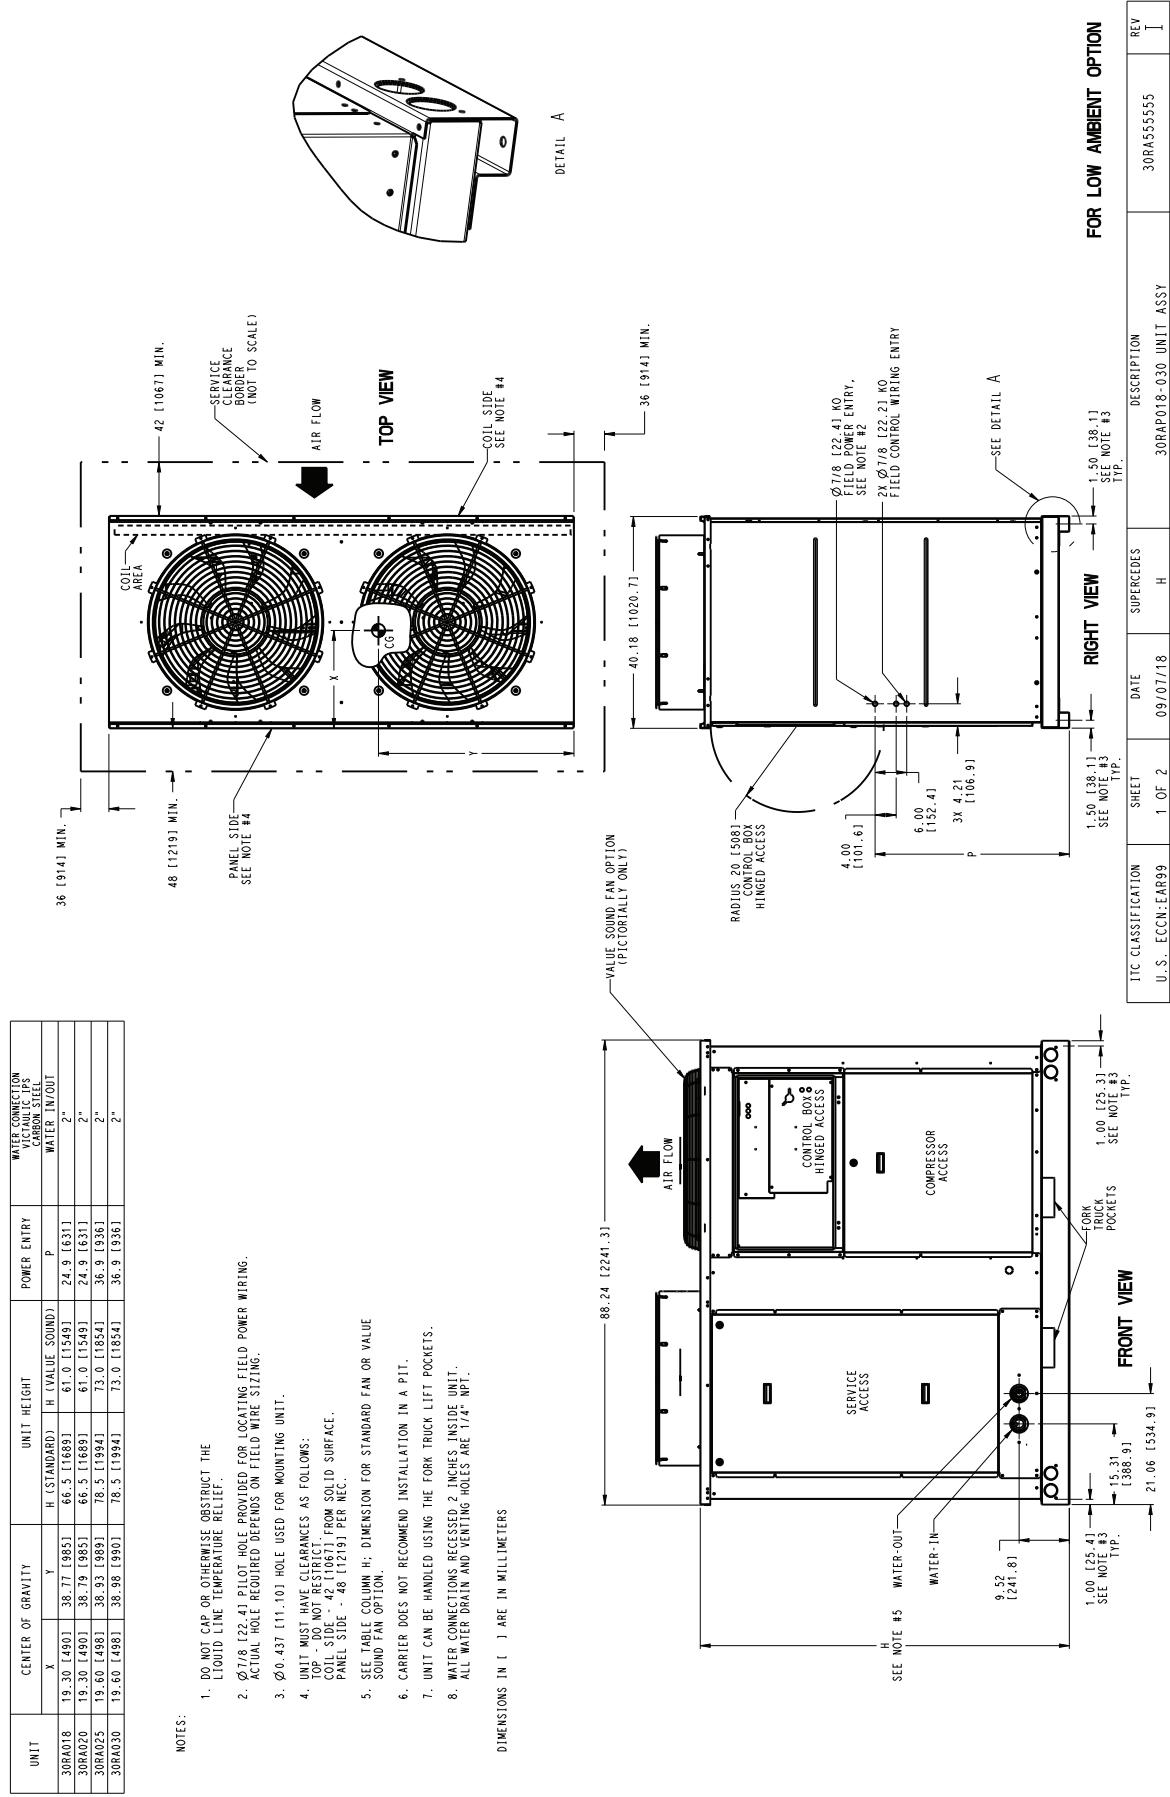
Dimensions — 30RAP018-030 Units with Fixed Speed Fans
